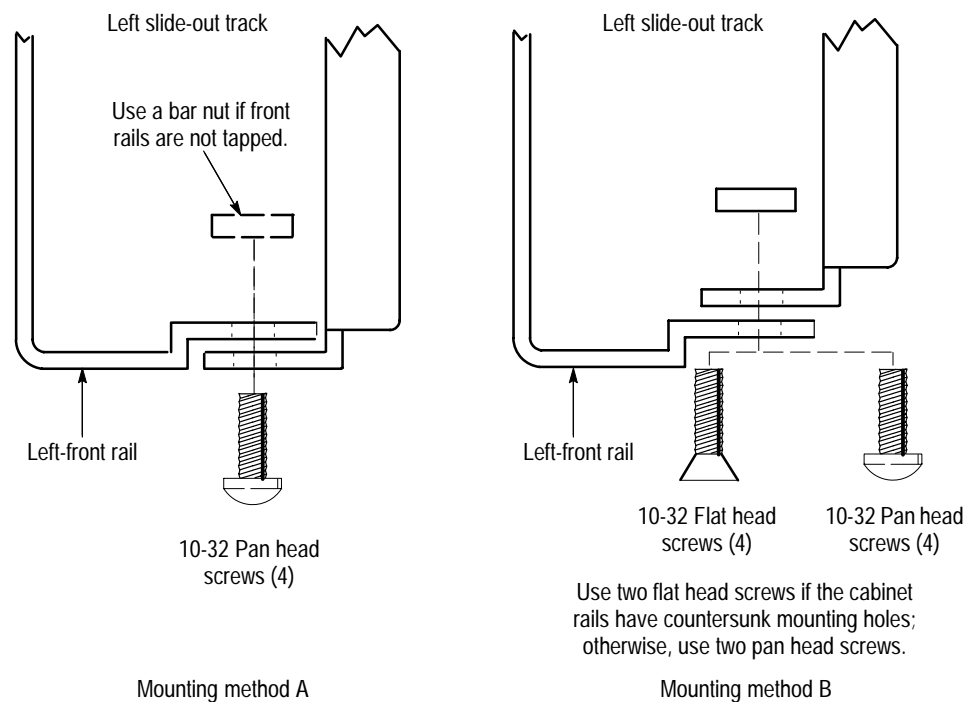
Installing the slide-out track assemblies in the rack (top view)
